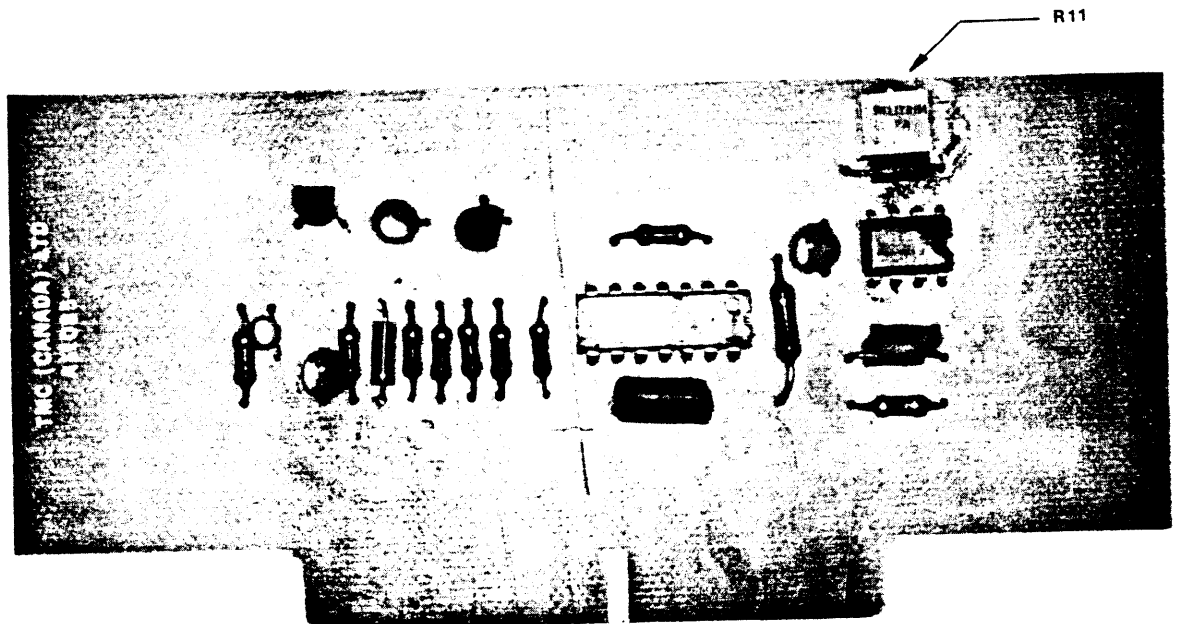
FREQUENCY TO VOLTAGE CONVERTER ASSEMBLY A11085-5
